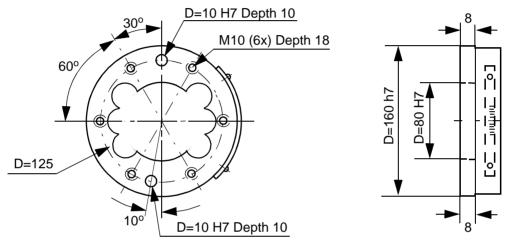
The mechanical interface of the insulated flange (dimensions in mm).
